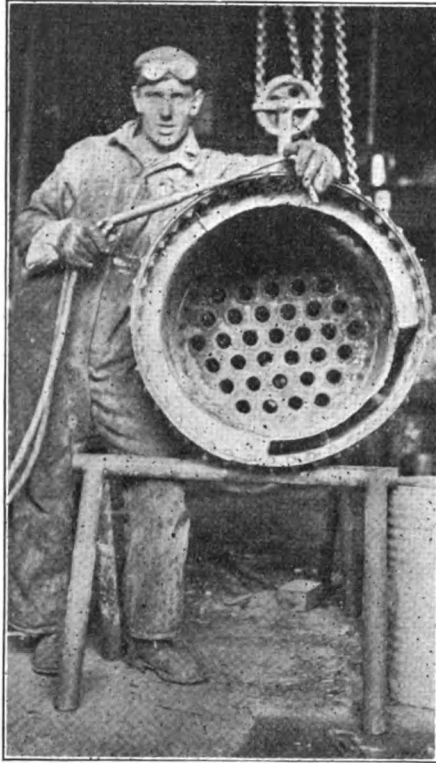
READY TO WELD THE LAST SECTION OF THE RING
